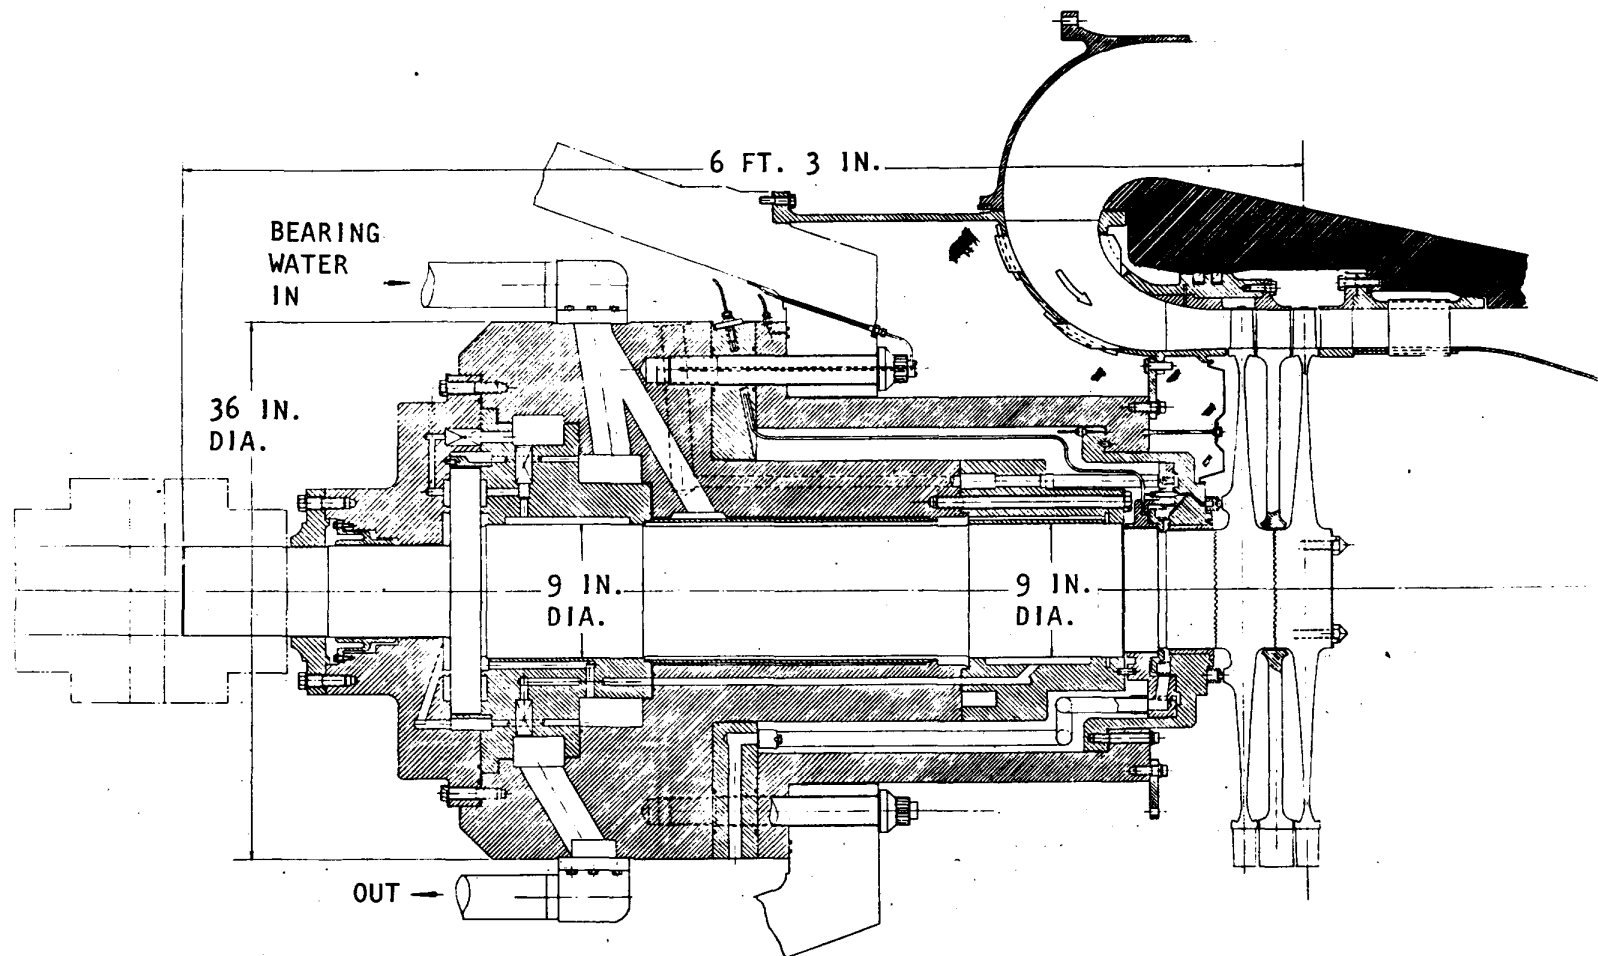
Axial compressor with water lubricated bearings and using external steam driver
